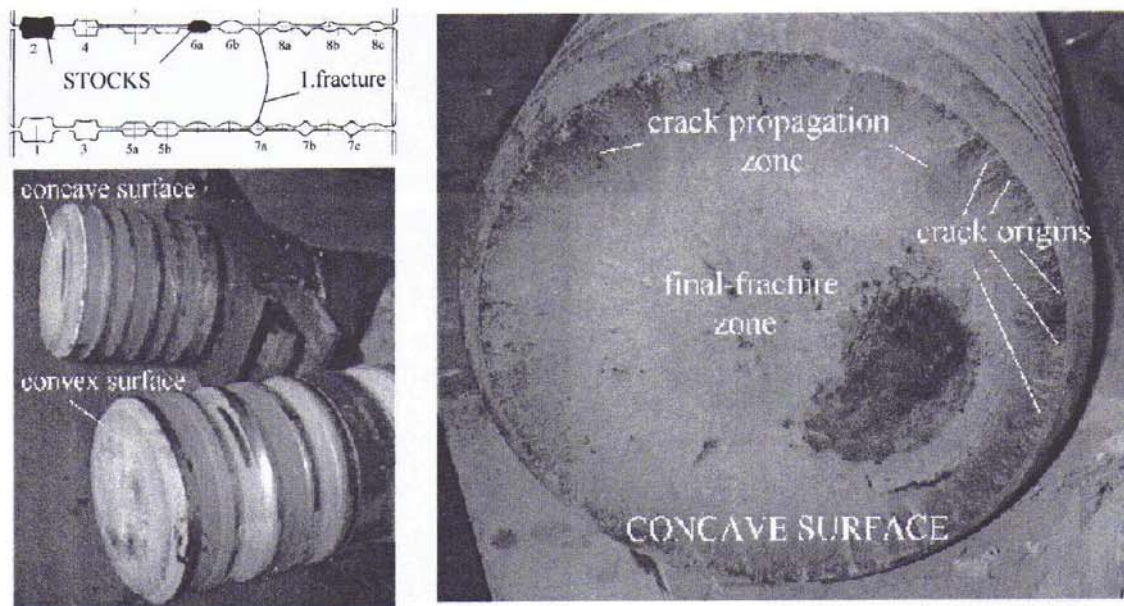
Fracture surfaces of the 1st broken roll and the position of the stocks in time of the fracture.
